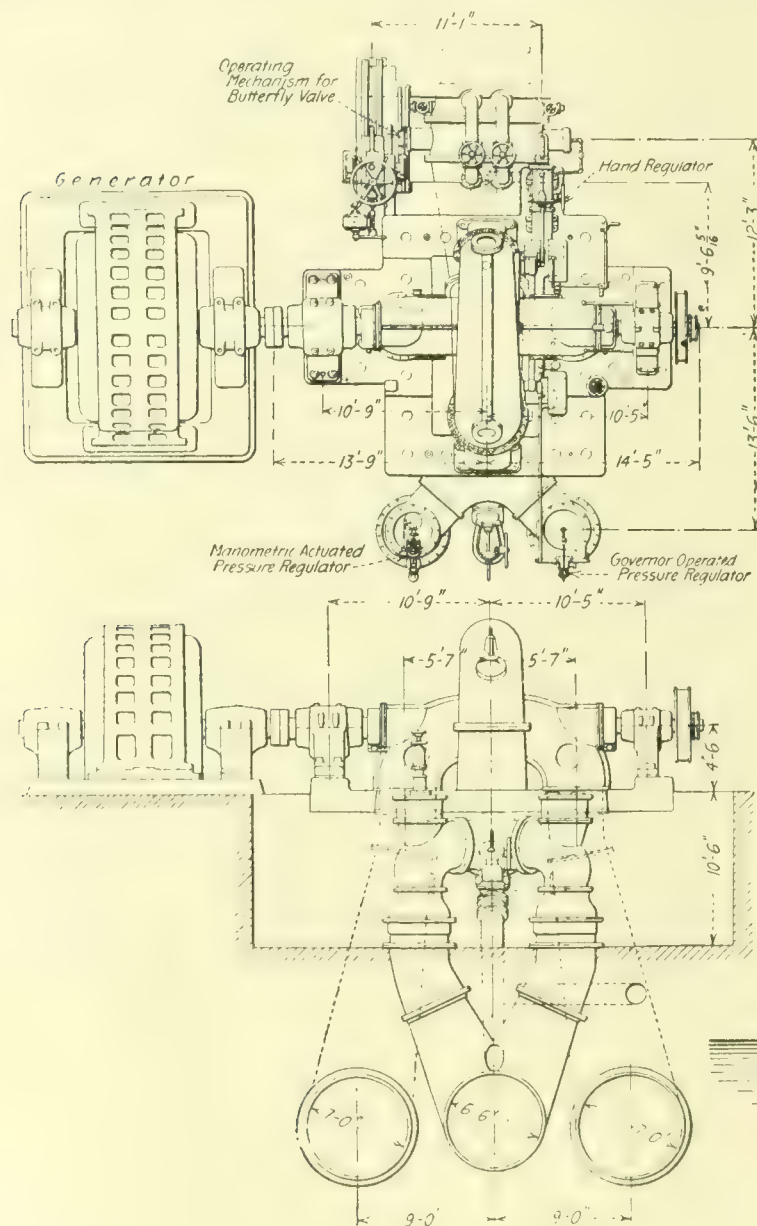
PLAN AND ELEVATIONS OF 18,000 H.P. FRANCIS TURBINE INSTALLATION
